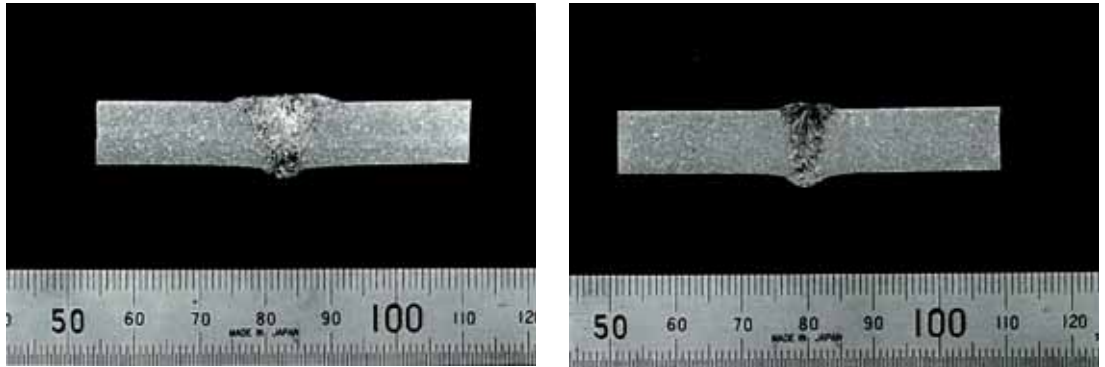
Macro sections of welded joints manufactured by GTAW process (left) and GTAW+SMAW (right)
